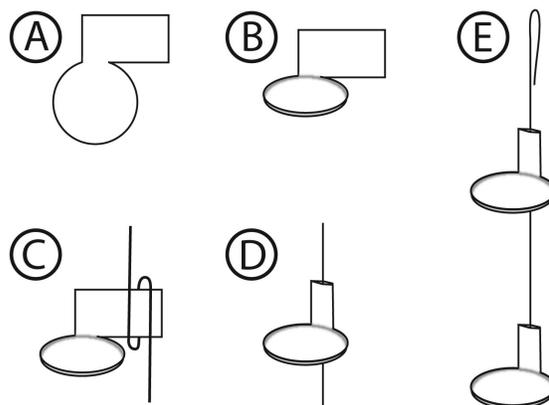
Fabrication of the double weighing pan. A) Cut out each pan from sheet metal, with a rectangular flange as shown. B) Bend the join between the pan and flange to a 90° angle. Press the round part over the end of a dowel, or similar tool, to create the shallow dish shape. C) Wrap a wire loop around the flange. D) Wrap the flange around the wire and crimp tightly. E) Repeat to make the lower pan. Trim the wire, leaving a loop at the top for a handle.
